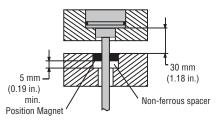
Model MH installation in magnetic material using a non-ferrous magnet spacer.
